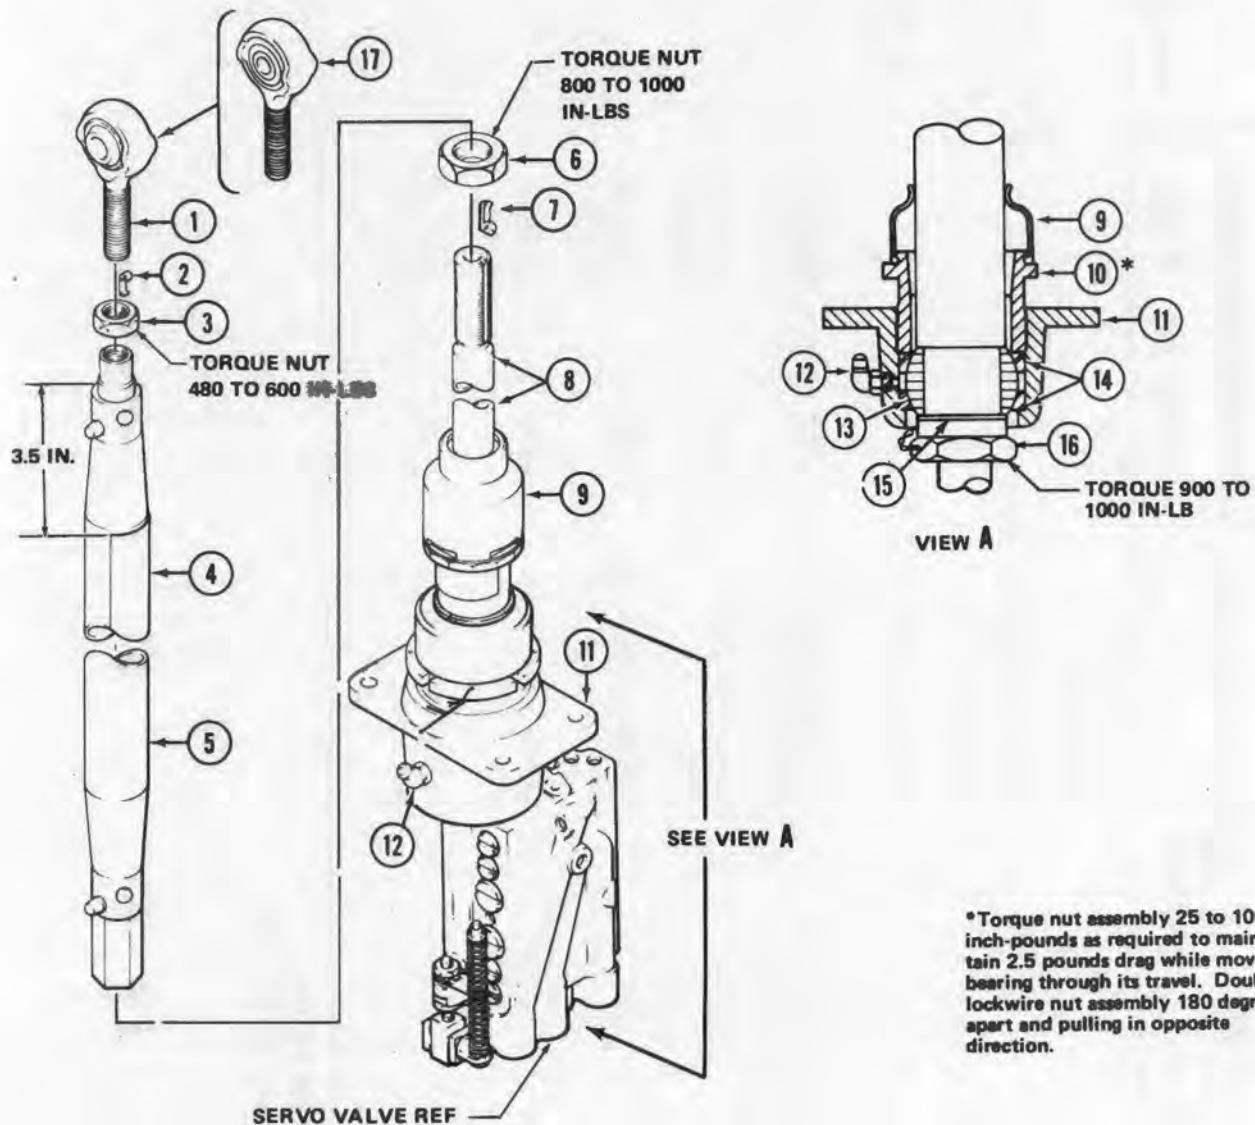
Hydraulic servo cylinder assembly (cyclic controls) — removal and installation (Sheet 2 of 2)
